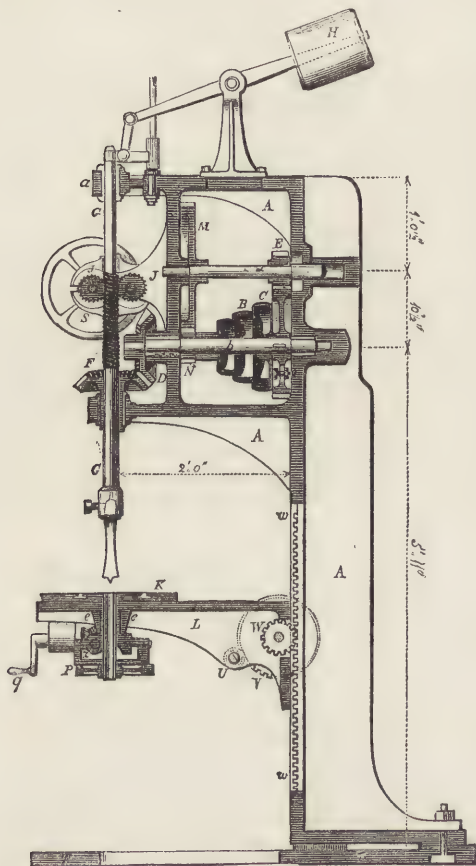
WHITWORTH'S DRILLING MACHINE.
